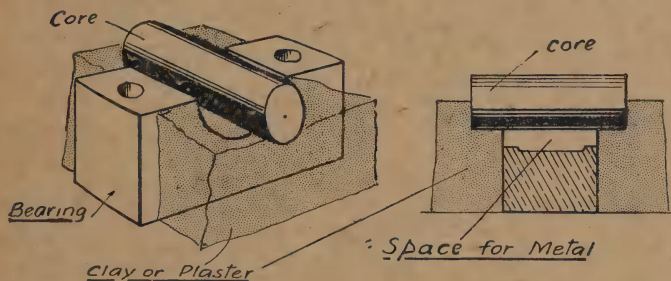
White-metalling or “Babbitting” a Bearing Brass
